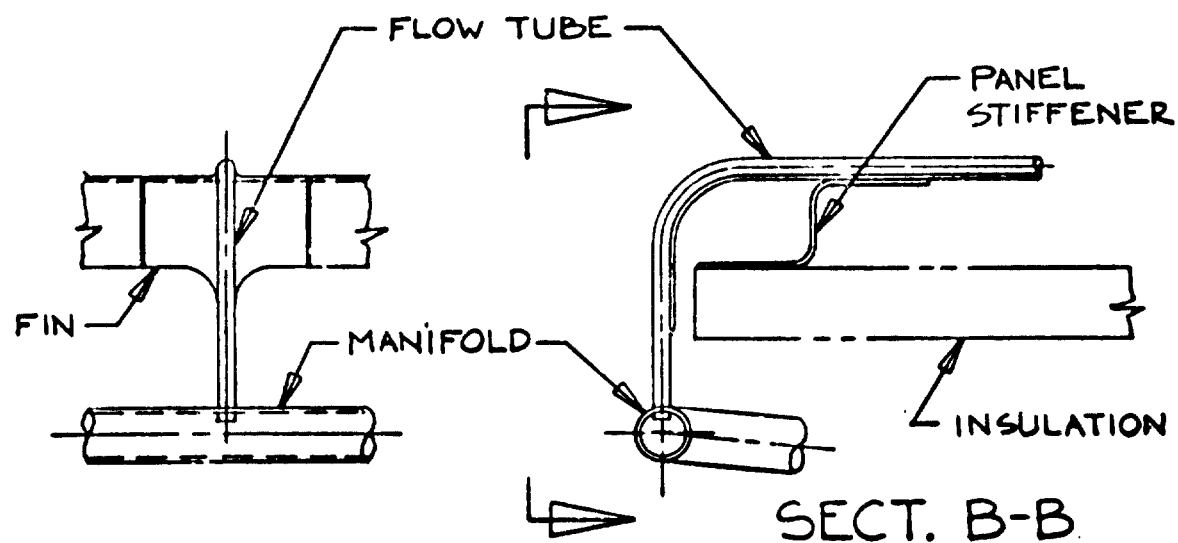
300°C Pumped Fluid Radiator Details
